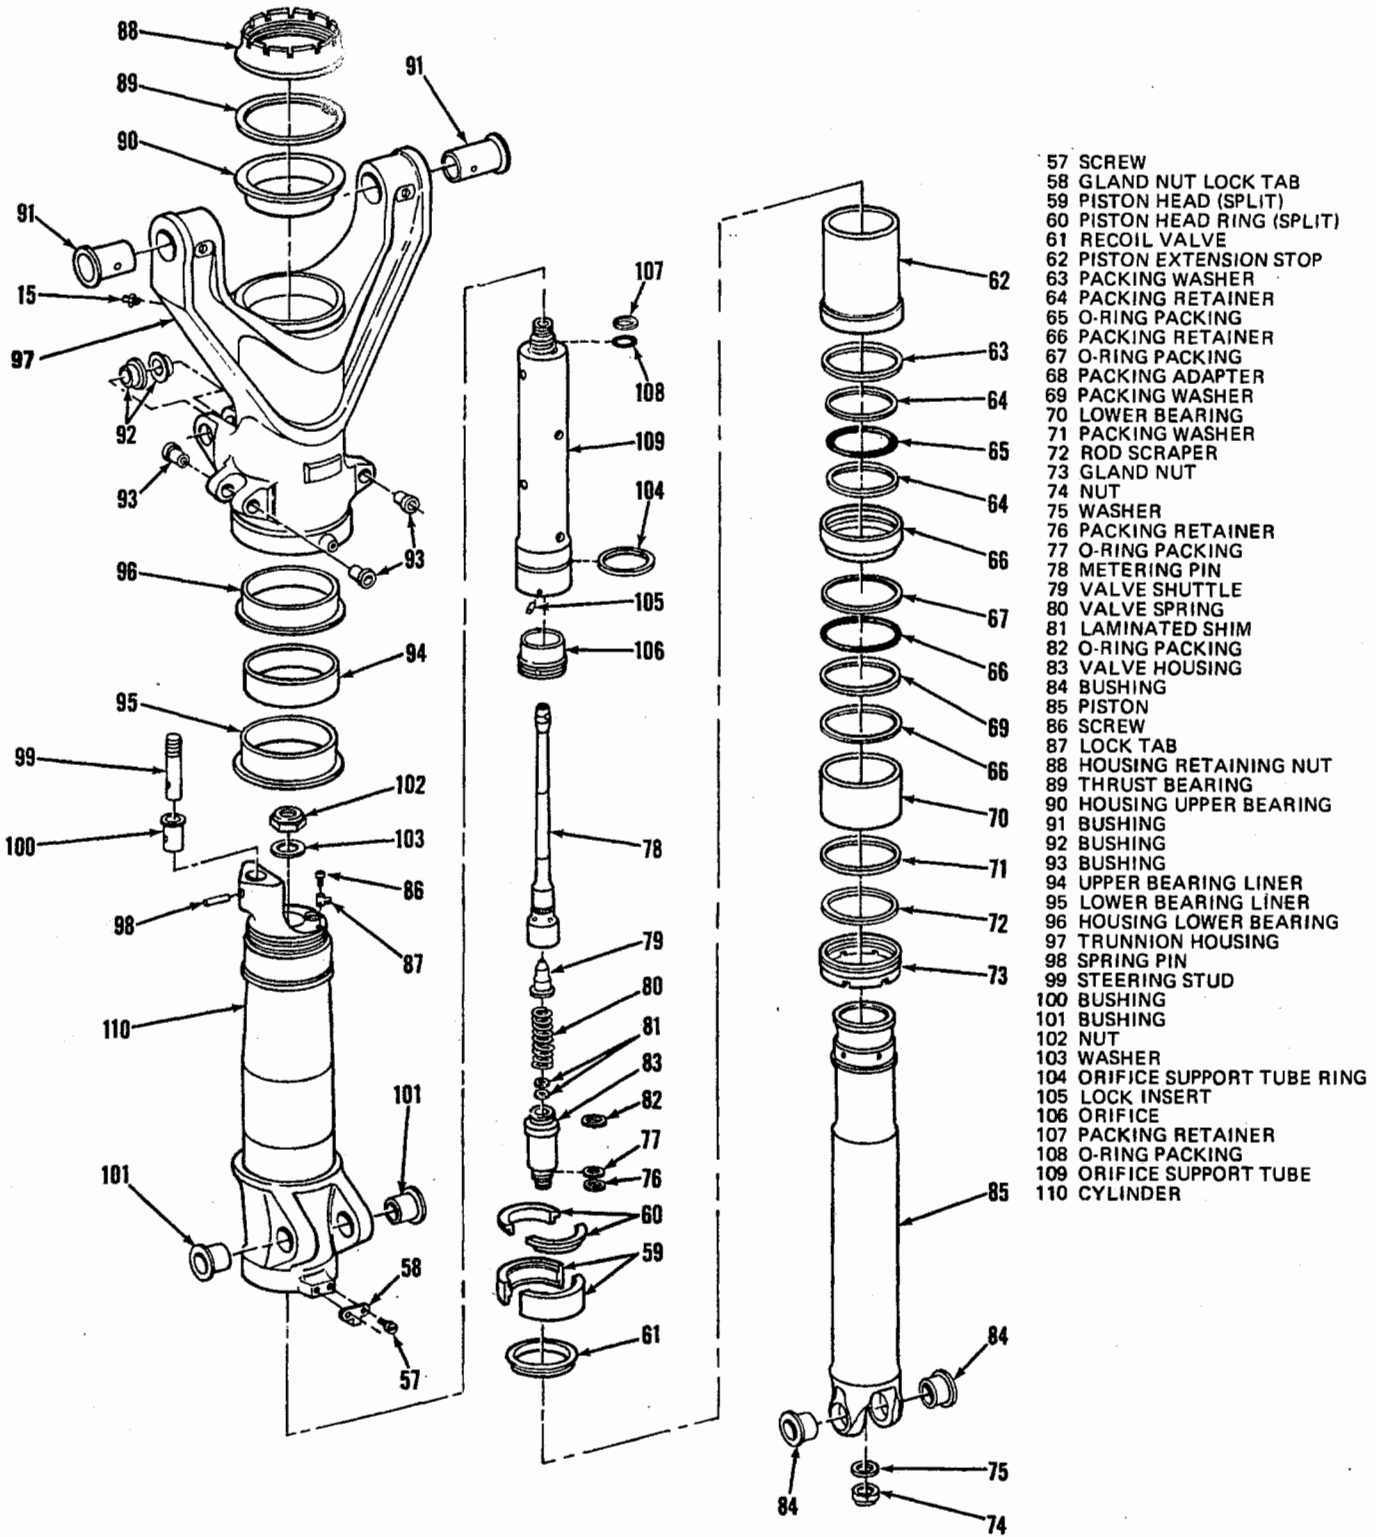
Nose Landing Gear Complete Shock Strut Assembly (Sheet 2 of 2)
